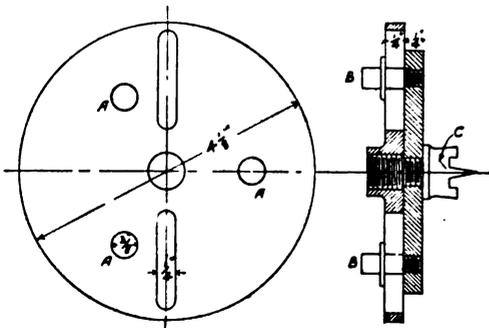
Faceplate. Fig. 2—Section X. Y.
